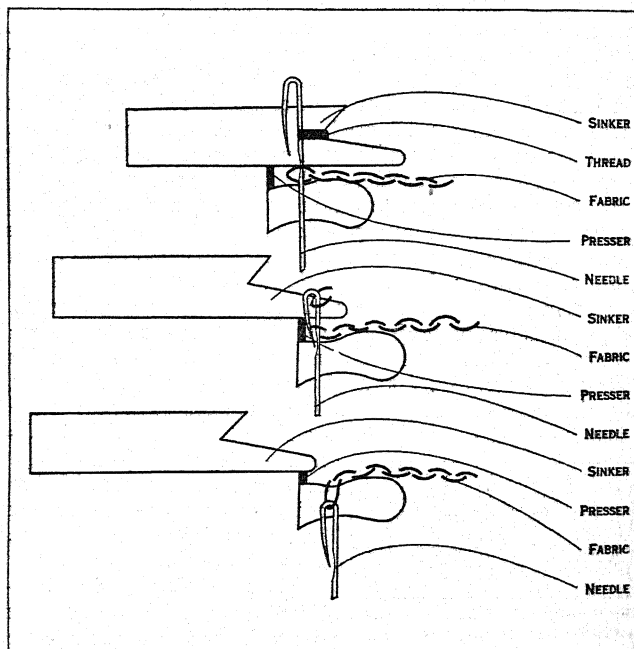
BEARDED OR SPRING NEEDLE USED FOR MACHINE KNITTING
